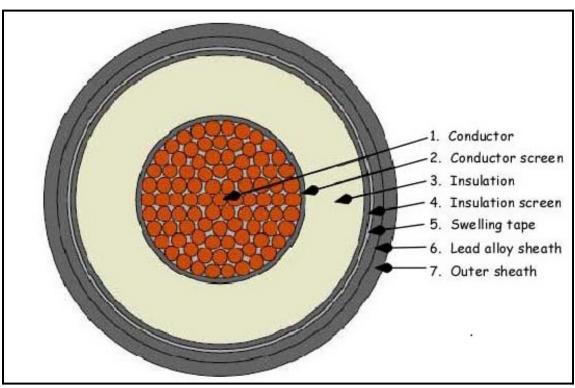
EXAMPLE TERRESTRIAL HVDC TRANSMISSION CABLE CROSS-SECTION
